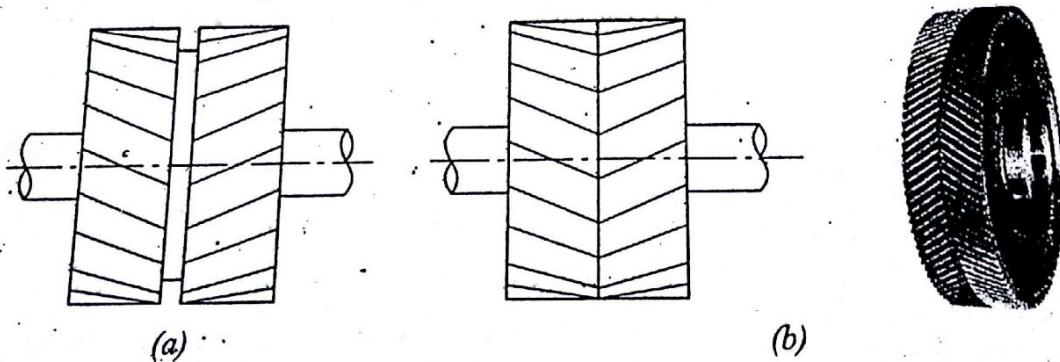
(a) Double helical gear, (b) Herringbone gear
